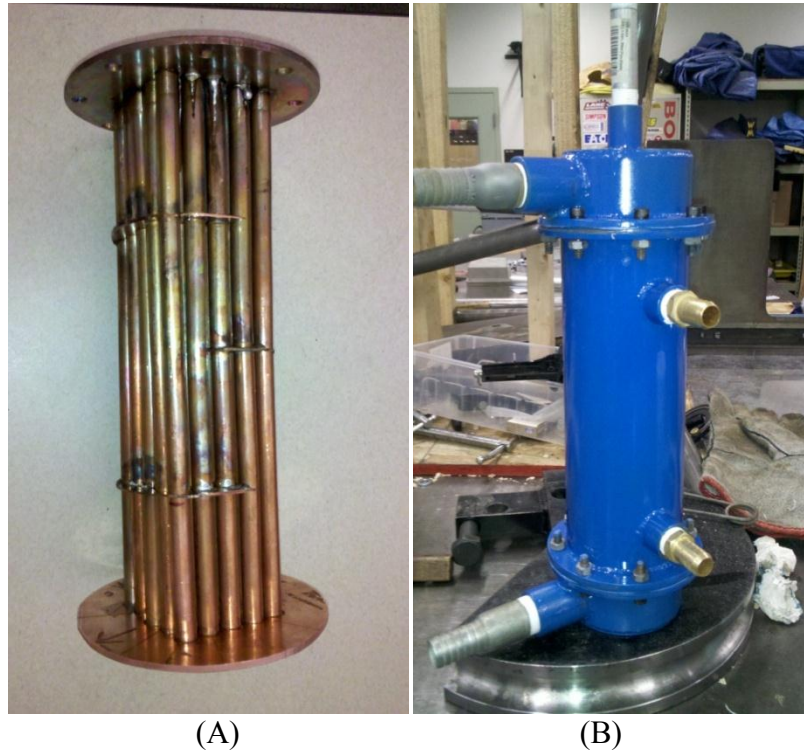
Heat exchanger tube core (A), Completed heat exchanger (B)
